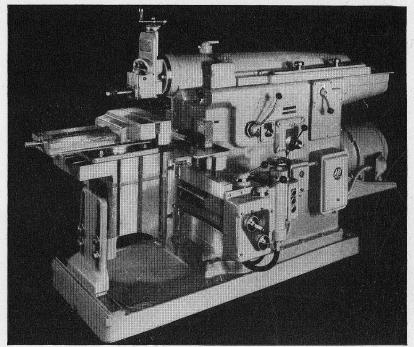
Hydraulic shaper. (The Rockford Machine Tool Company)
